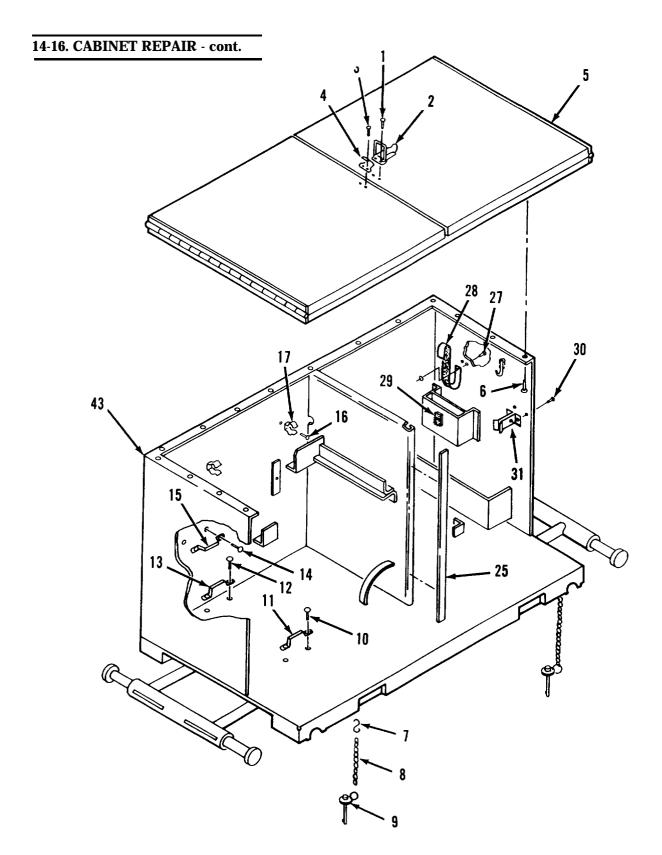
Cabinet Disassembly (Sheet 1 of 2).
